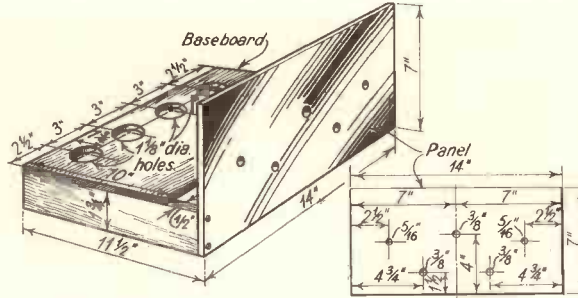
DETAILS AND DIMENSIONS OF CHASSIS.
